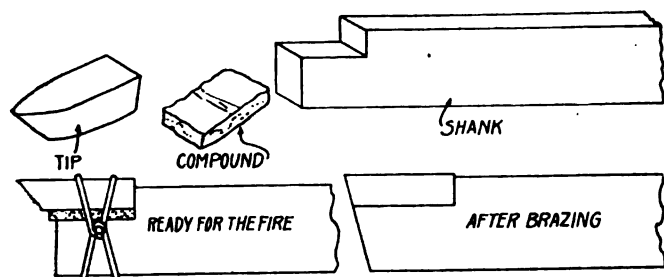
Simplest Form of Welded Tool Tip.
